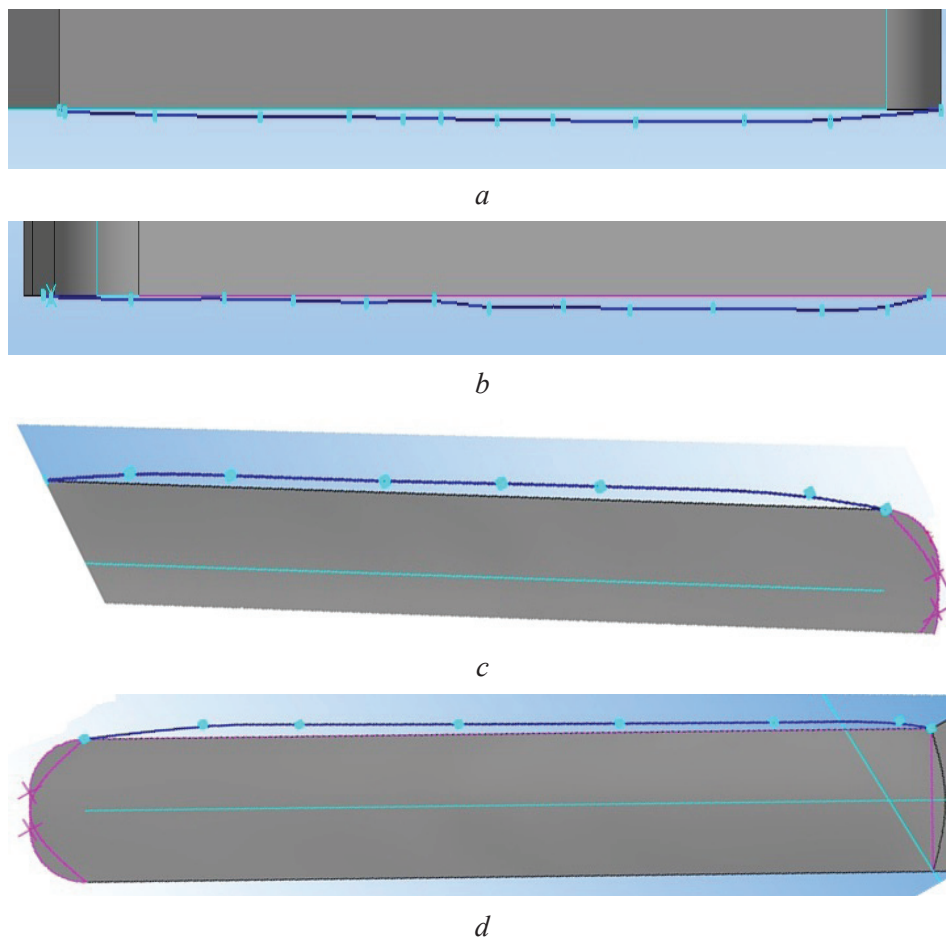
Modified geometry of the mold taking into account the performed calculations on the surface:
